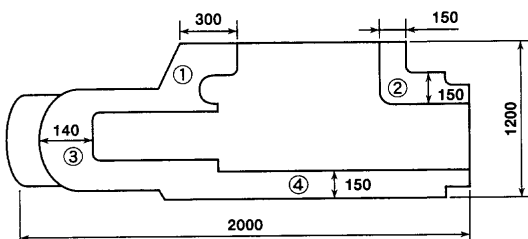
The shape and dimensions of the trial valve and the test specimen sampling position.
